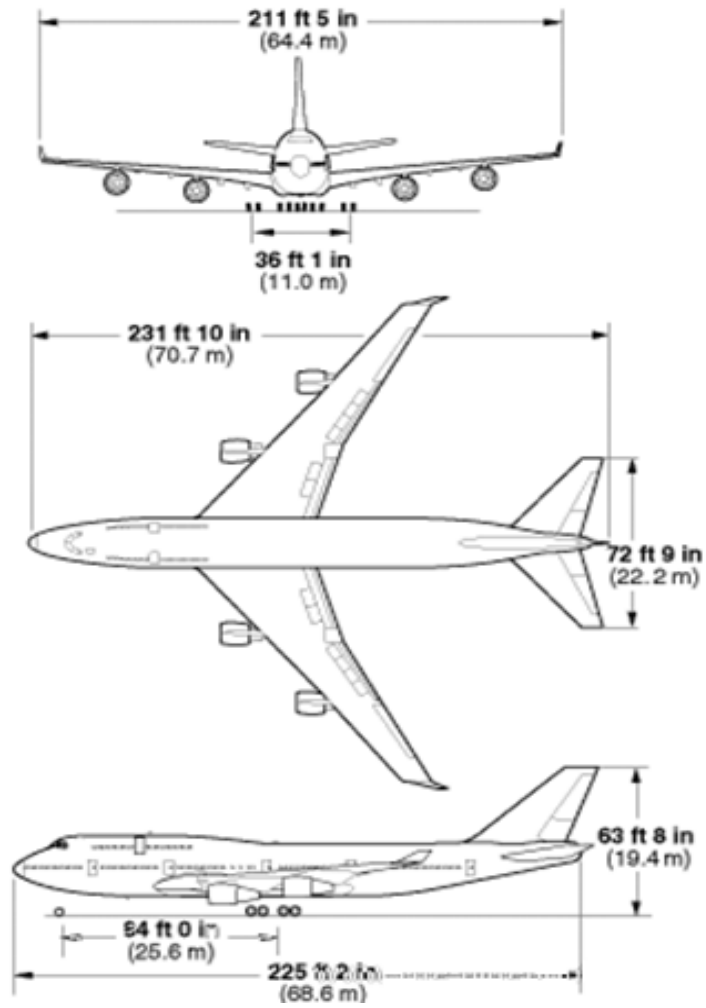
Boeing 747 -400 Geometrical Dimensions and its model made in Abaqus/CAE
